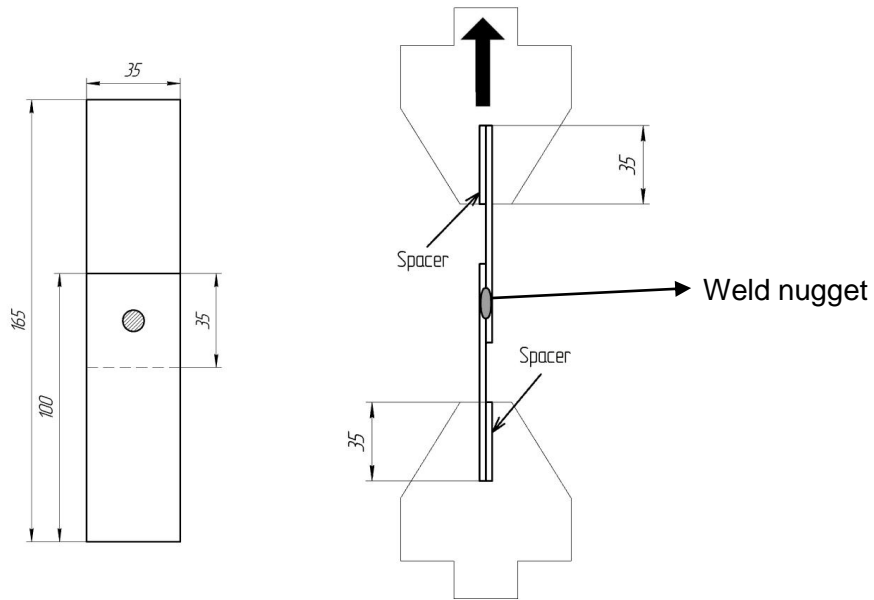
Test coupon geometry and tensile shear test set-up [40]
